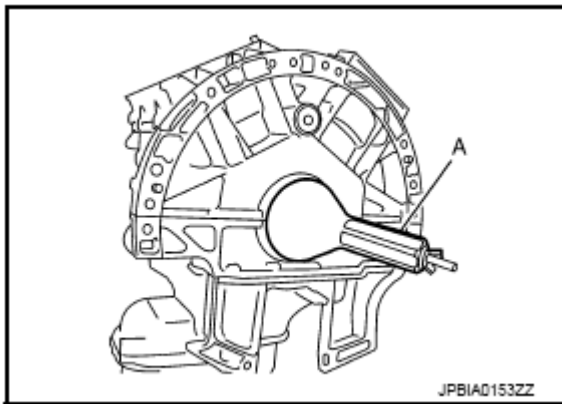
Pressing To Fit Rear Oil Seal Using Suitable Drift
